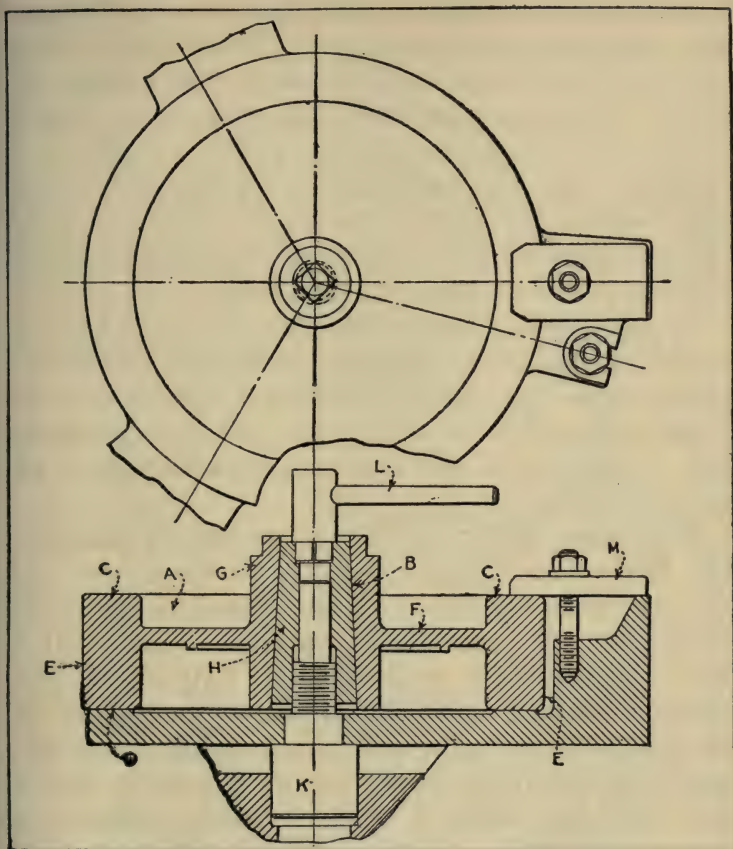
HOLDING A PIECE OF WORK BY ITS TAPERED HOLE
